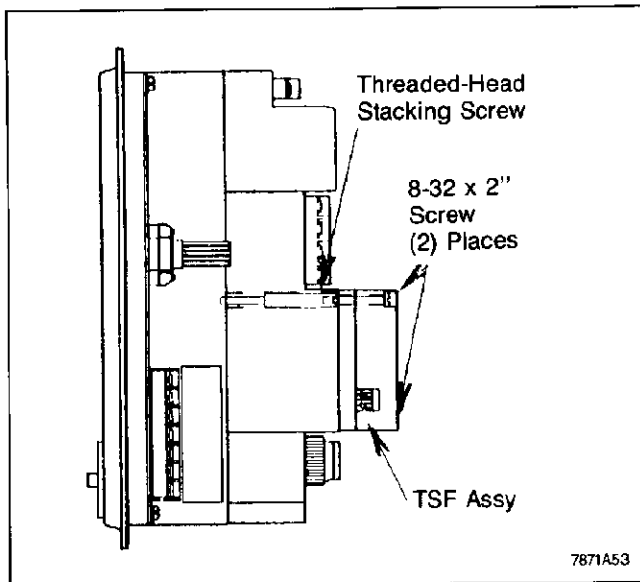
IQ Data Plus (II), with Power Module and threaded-head stacking screw
